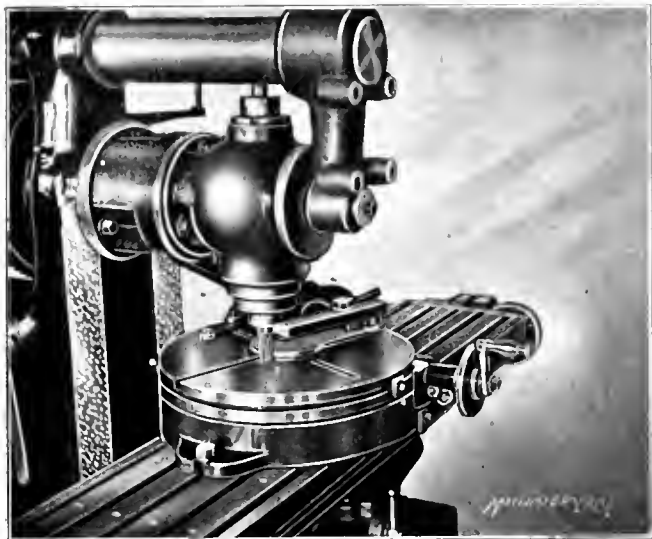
Use of the Circular Milling Attachment in Finishing Straight and Circular Surfaces.
